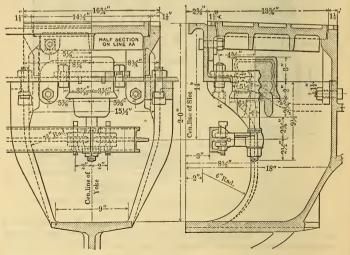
SIDE ELEVATION AND SECTION OF INSULATOR FOR UNDERGROUND CONDUIT.
